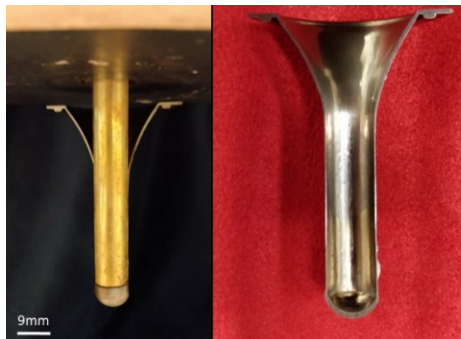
Pre-shape forming with the stretch blow molding equipment before the blow molding step.
